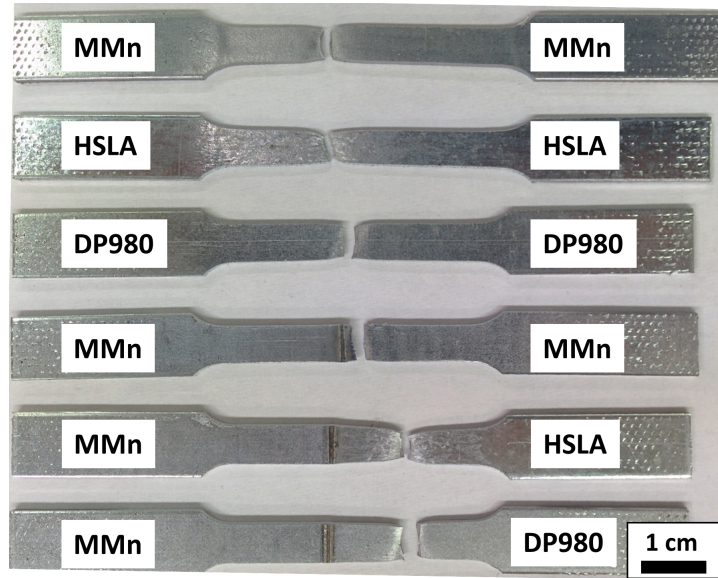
Typical tensile failure locations for BM and laser welded joints
